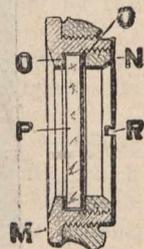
Detail Sectional View Showing Improved Construction of "Bull's Eye" sight-feed.
